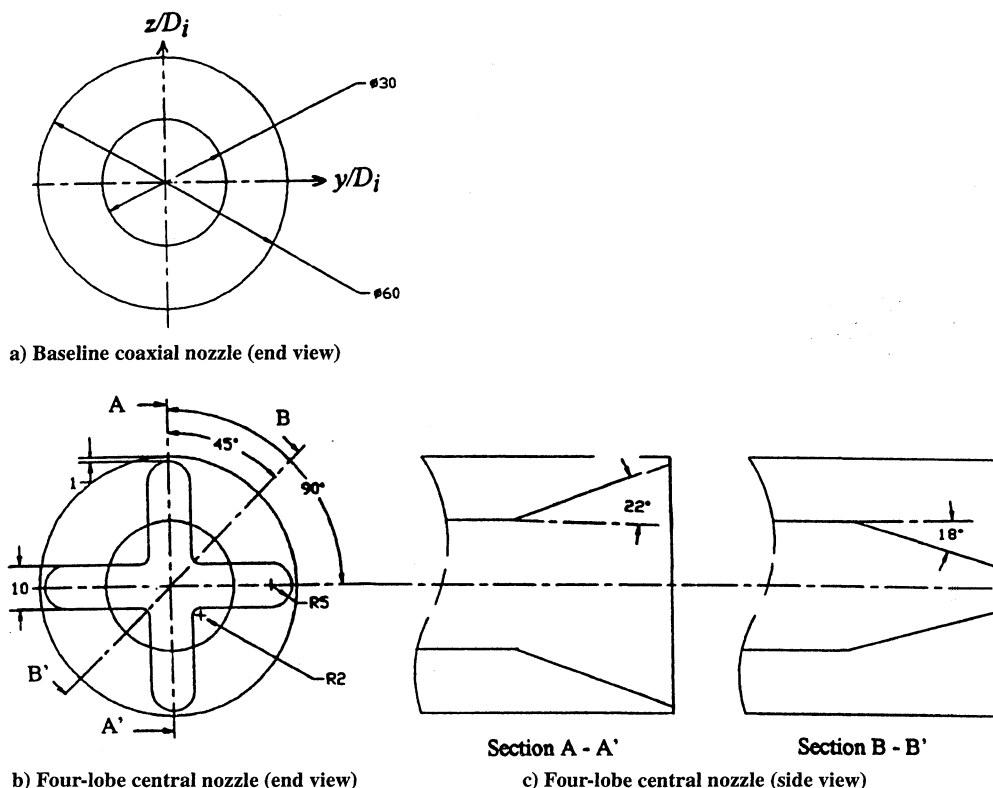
Coaxial nozzle configurations under investigation (all dimensions in millimeters, wall thickness = 1.5 mm).
